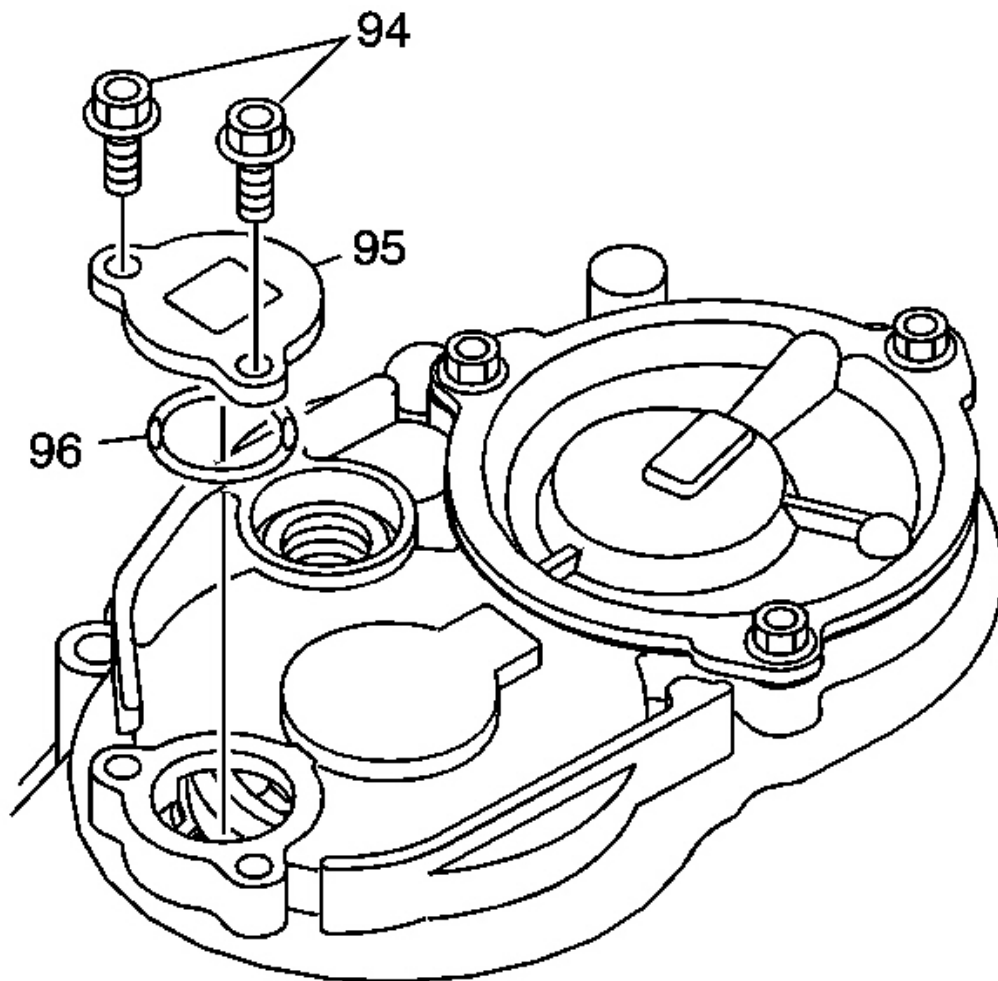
Output Shaft Rear Access Cover, Bolts, O-Ring Seal & Transmission Case
